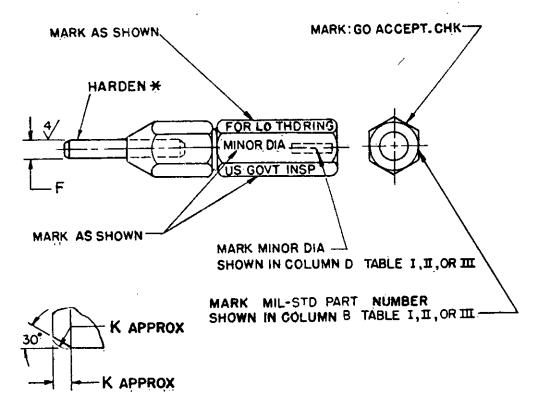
Truncated thread setting plug gage (taperlock type).
